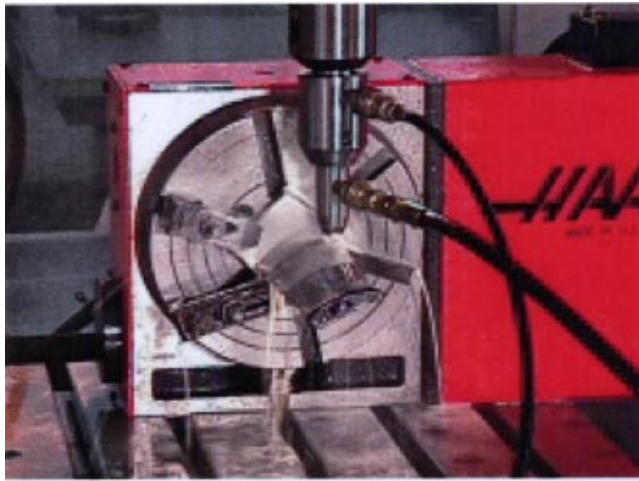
An engine compressor blade under PPB processing using a four-axis mode in CNC mill
